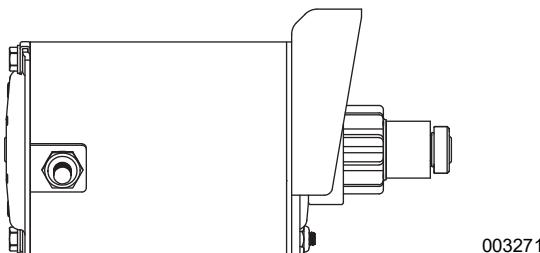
Starter Motor (410cc Single Cylinder Engine Units Only)
